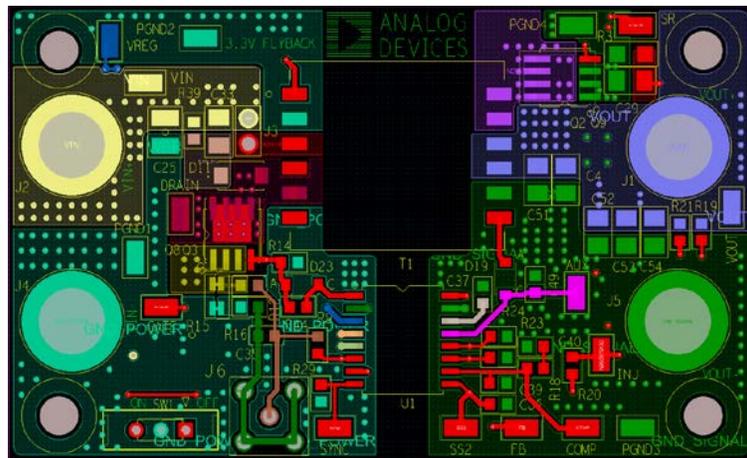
Printed Circuit Board (PCB) Layout, Top Layer
